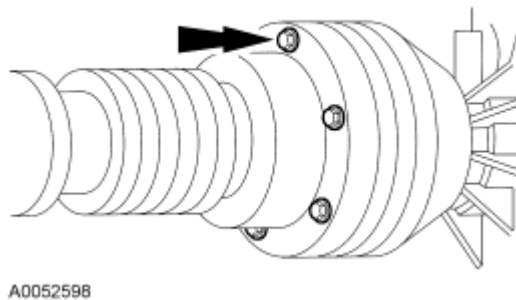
Front Driveshaft-To-Transfer Case Bolts
